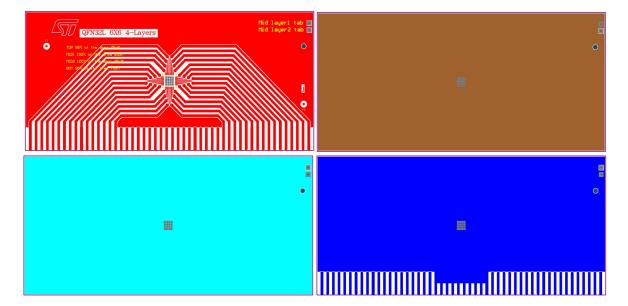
QFN (6x6 mm) PCB 8 cm<sup>2</sup>
